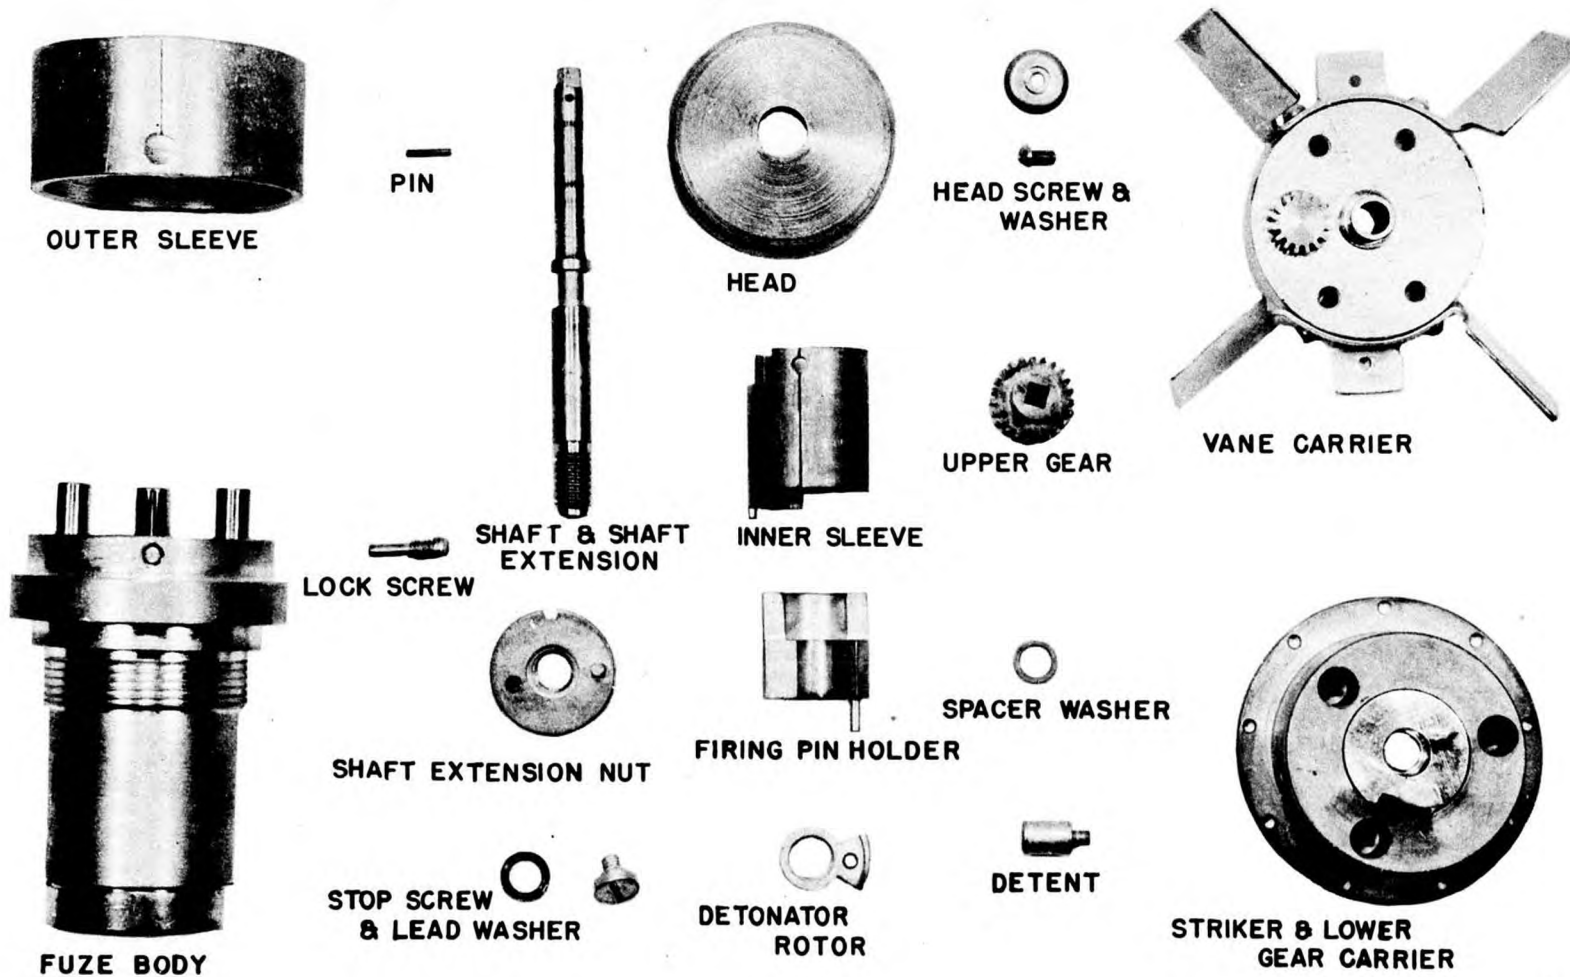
BOMB FUZE, MARK 219 MODS 2, 3 AND 4: DISASSEMBLED PARTS
